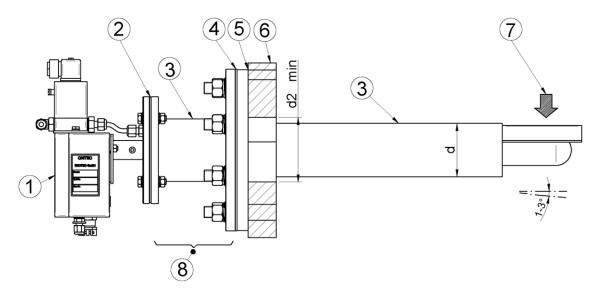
Mounting of the O₂ probe – for dimensions, see section B.
